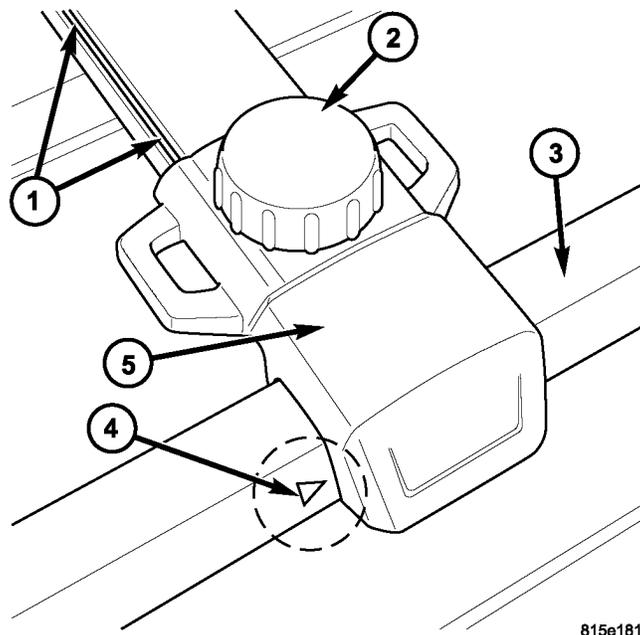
ROOF RACK BOW ALIGNMENT MARK
